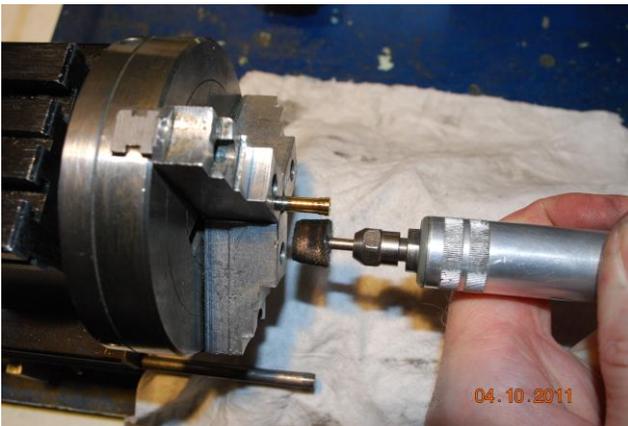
Polishing a dial pillar in the lathe with a Dremel tool. A felt buff is used with Tripoli compound to quickly bring the part to a mirror finish. The chuck has aluminum jaws and holds the part without scratching.
